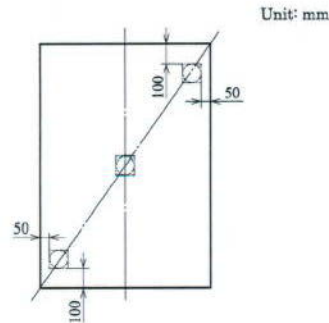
Test piece sampling position (for sheet-by-sheet zinc-coating method)
